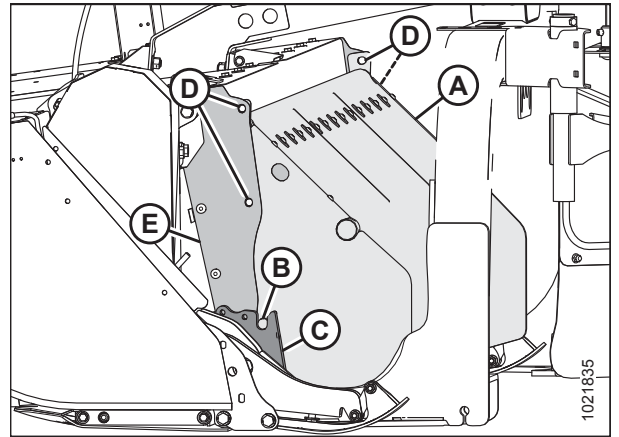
Header Side View (Left Side Shown, Right Opposite)
